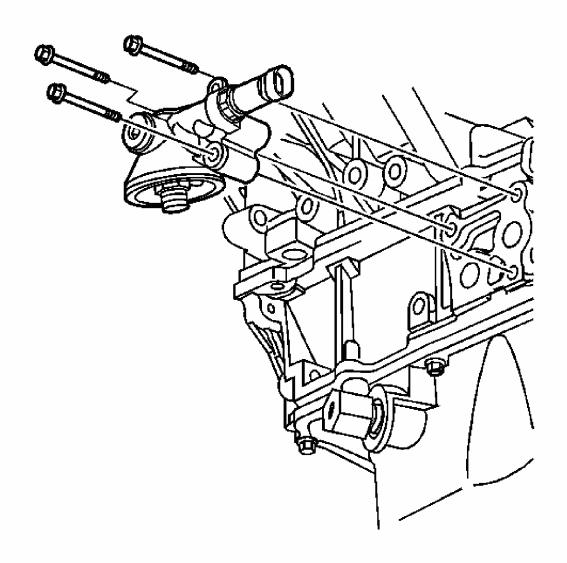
View Of Oil Filter Adapter & Bolts (without Oil Cooler) Courtesy of GENERAL MOTORS CORP.
